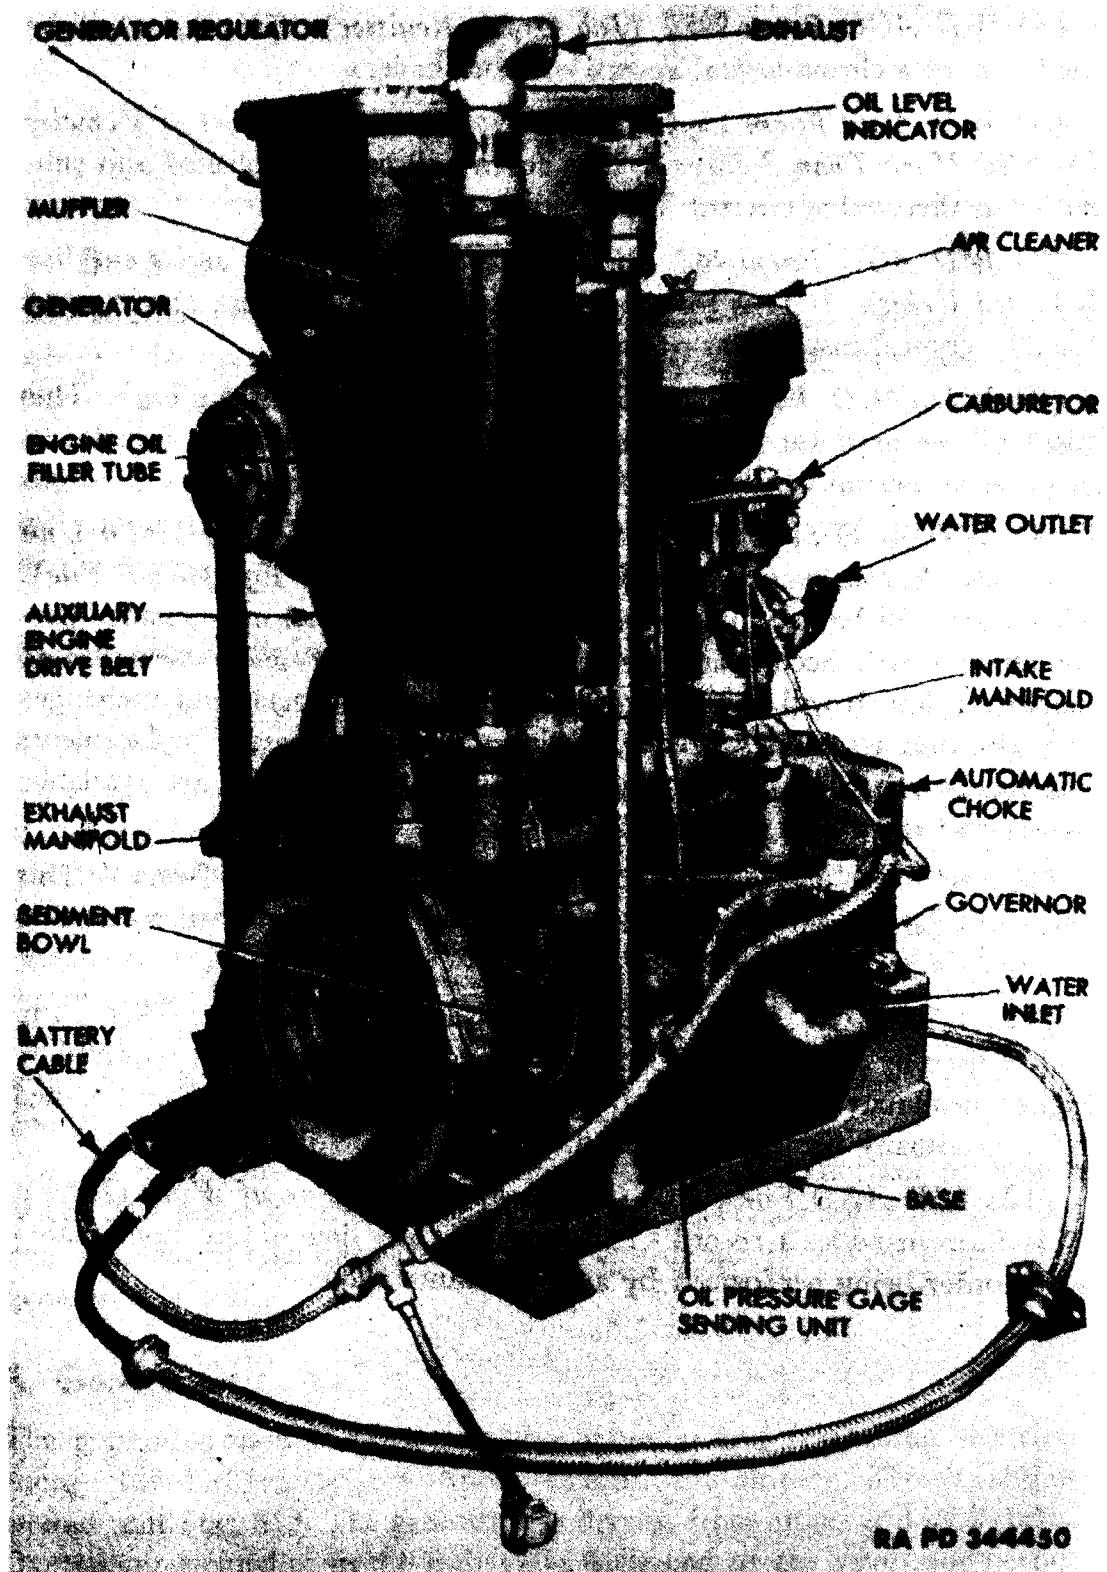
Auxiliary engine w/generator and regulator assembly—right rear.
